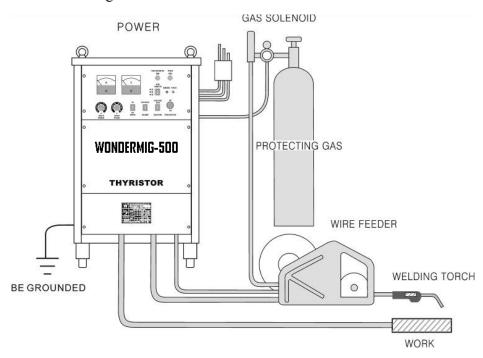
Connection of welder with base metal, wire drive feed unit, welding gun, cylinder.
